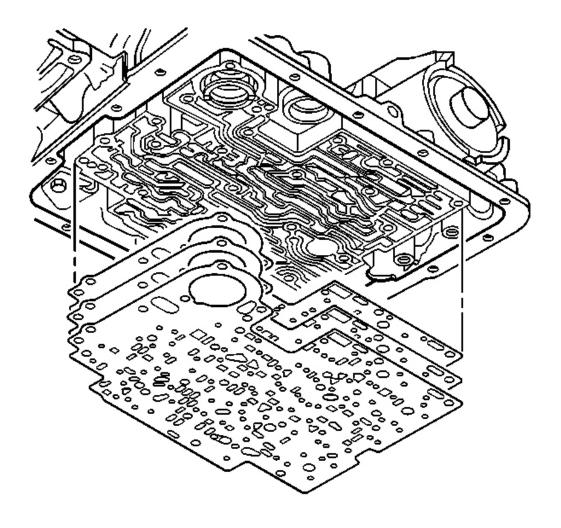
View Of Spacer Plate Support & Bolts Courtesy of GENERAL MOTORS CORP.
